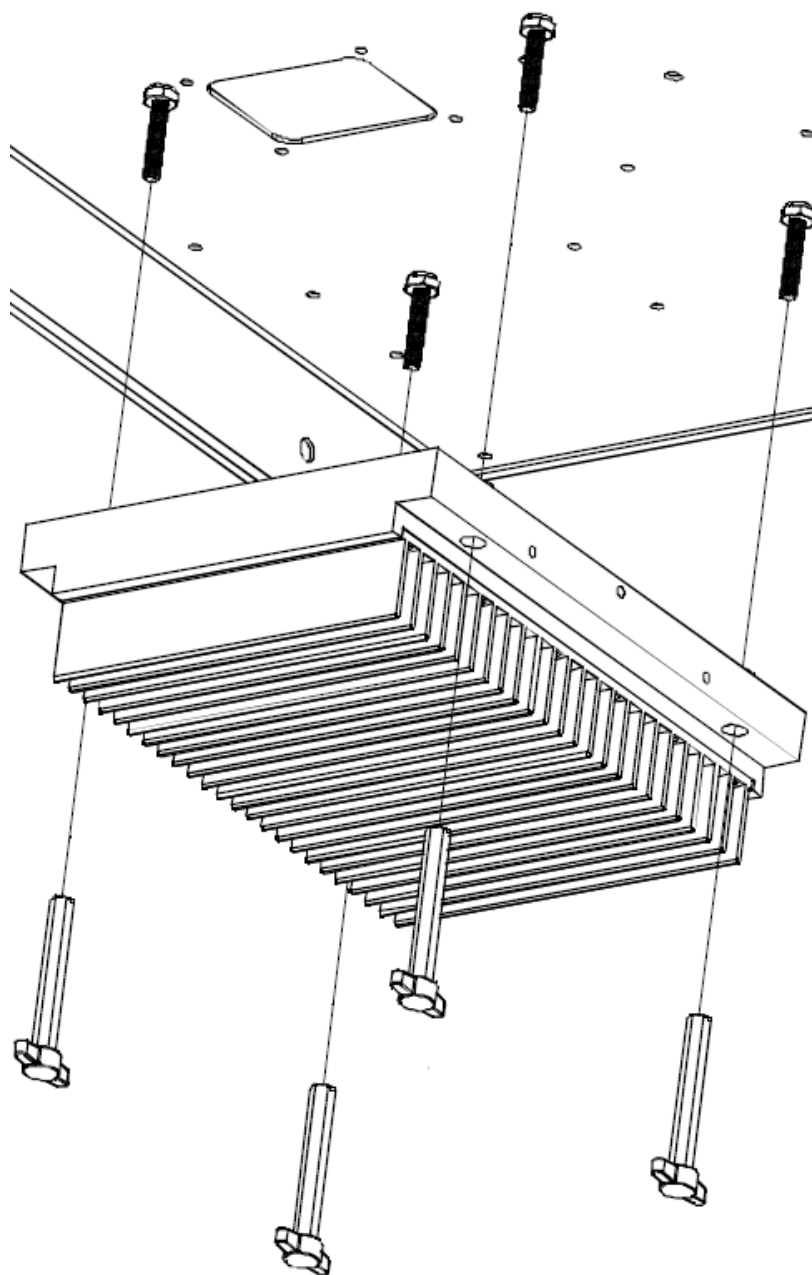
VHF Radio Secured in Mounting Bracket Using Four Wing Knobs
